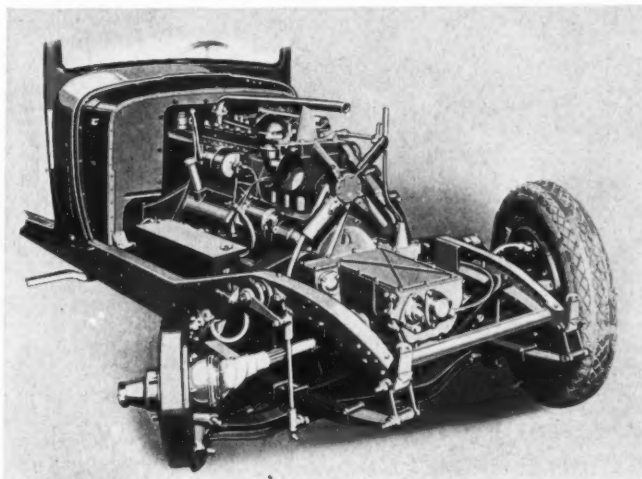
Ruxton front end. Note axle bed speedometer drive, gear shift and battery location
